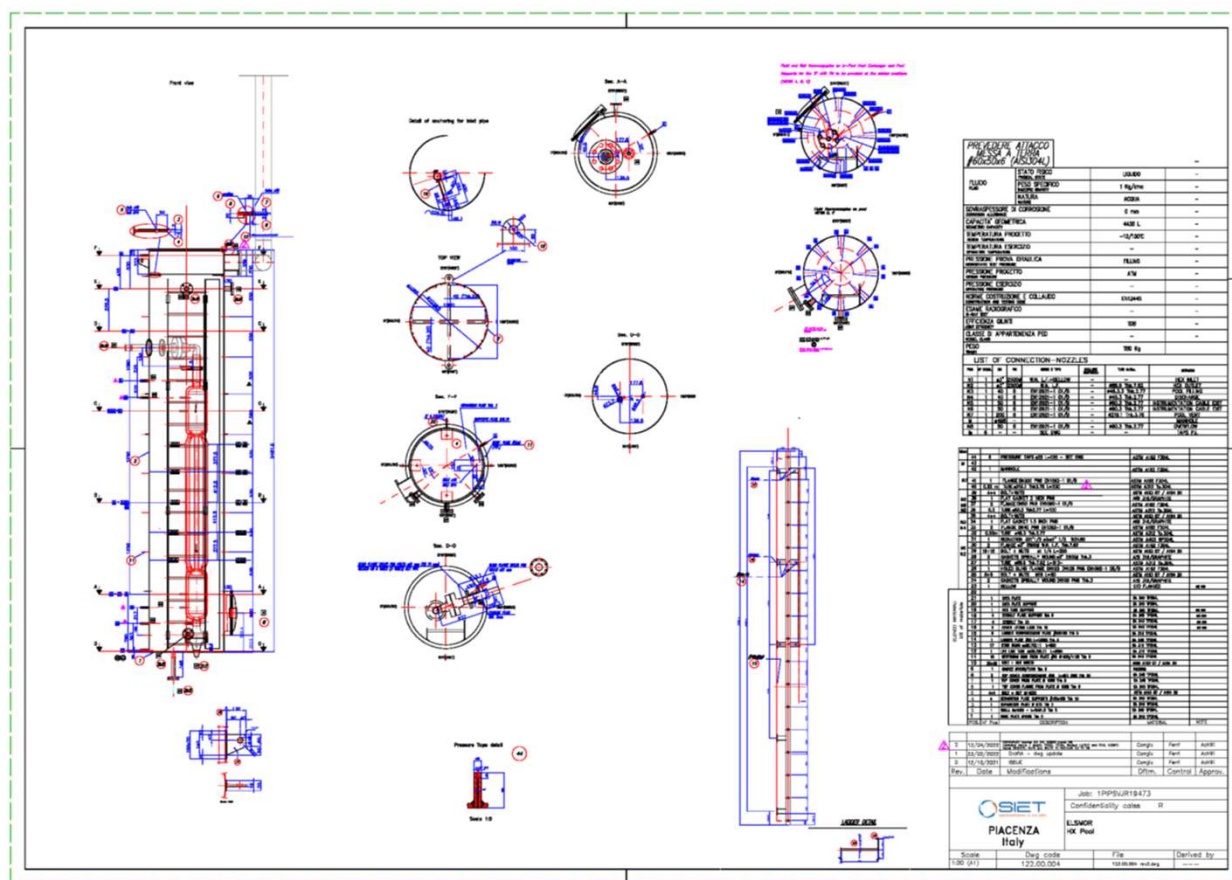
Rev.4 Sheet 4 of 7
